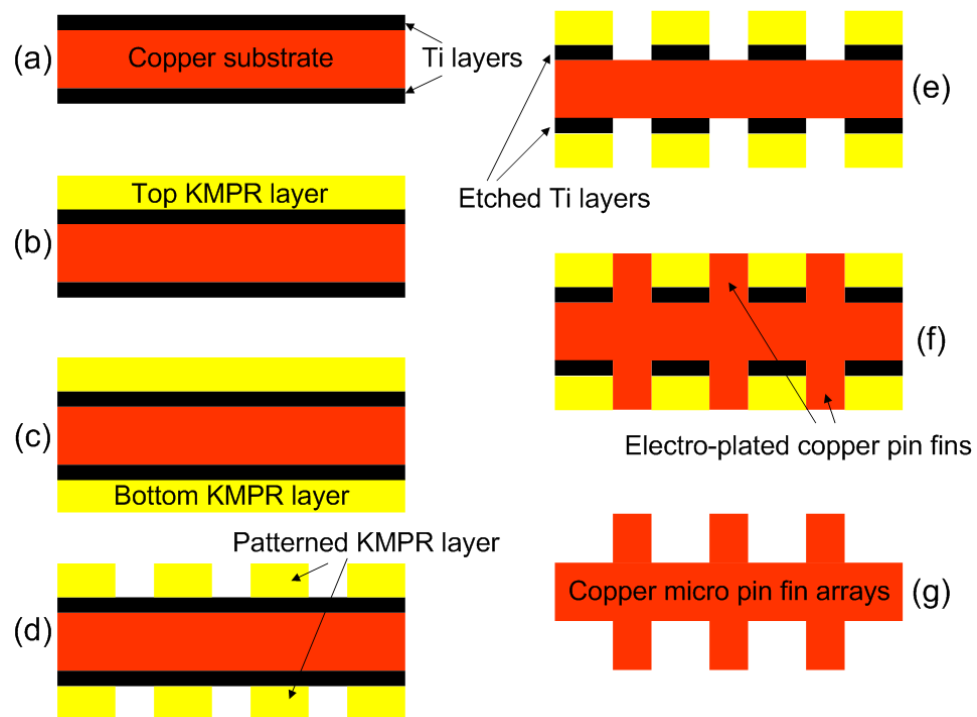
Fabrication process of double-sided micro pin-fin surface, (a) double-sided Ti metal layer deposition, (b) top layer KMPR coating, (c) bottom layer KMPR coating, (d) KMPR photoresist mold development, (e) double-sided etching of Ti layers, (f) electroplating of the copper pin fins, (g) removal of the KMPR and Ti layers.
